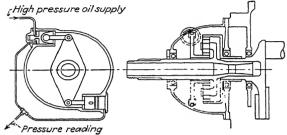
Schematic diagram of Pratt and Whitney torque indicator.
